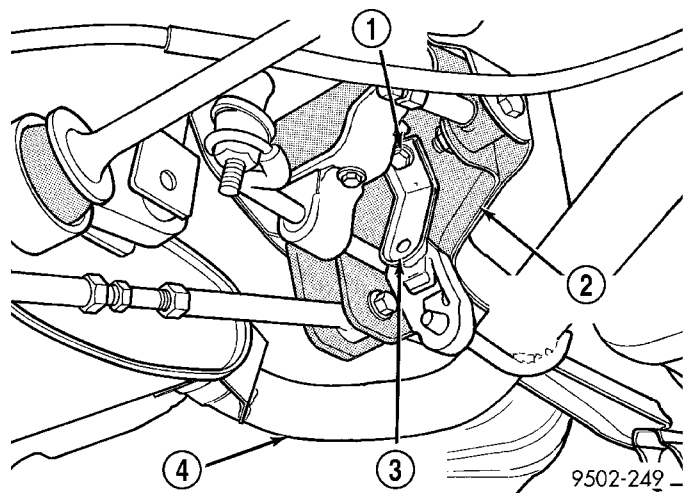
Exhaust Pipe Hanger At Rear Suspension Crossmember
